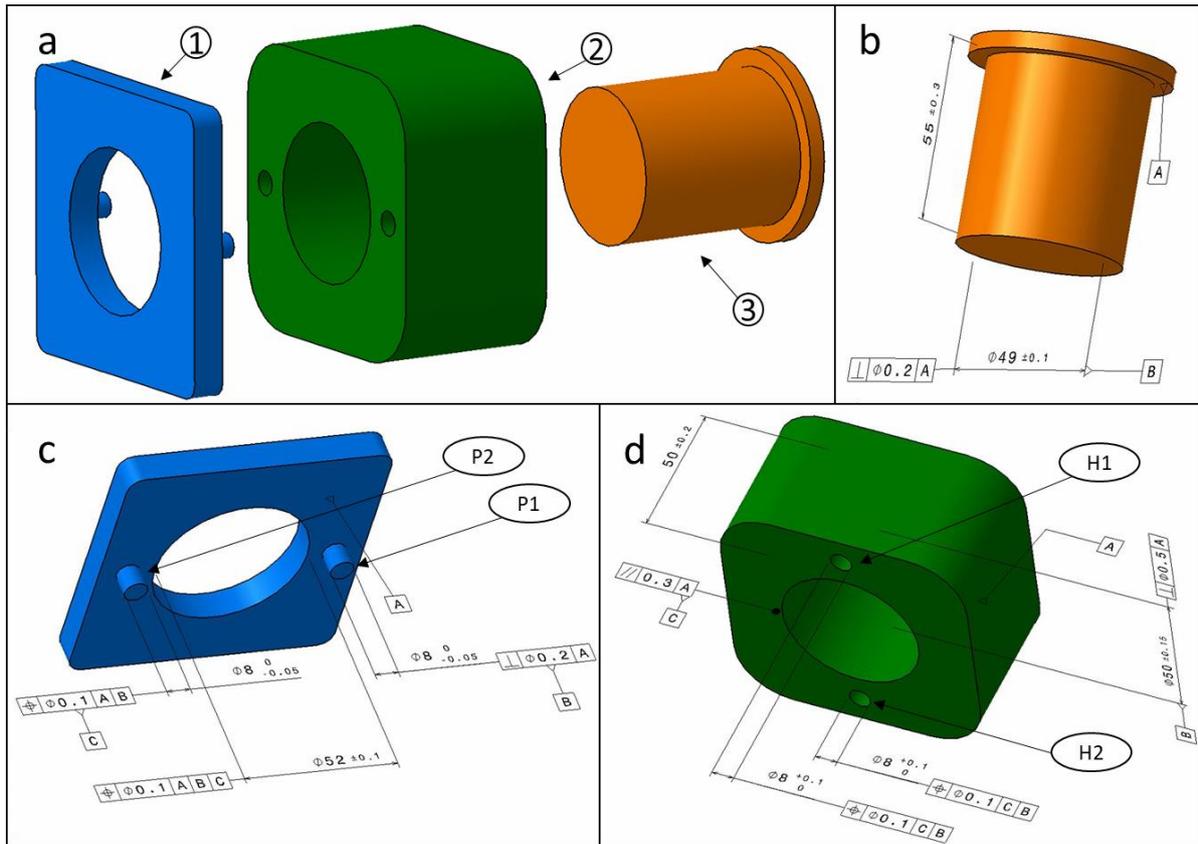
Mechanical product: Assembly (a), shaft (b), plate (c) and support (d)
